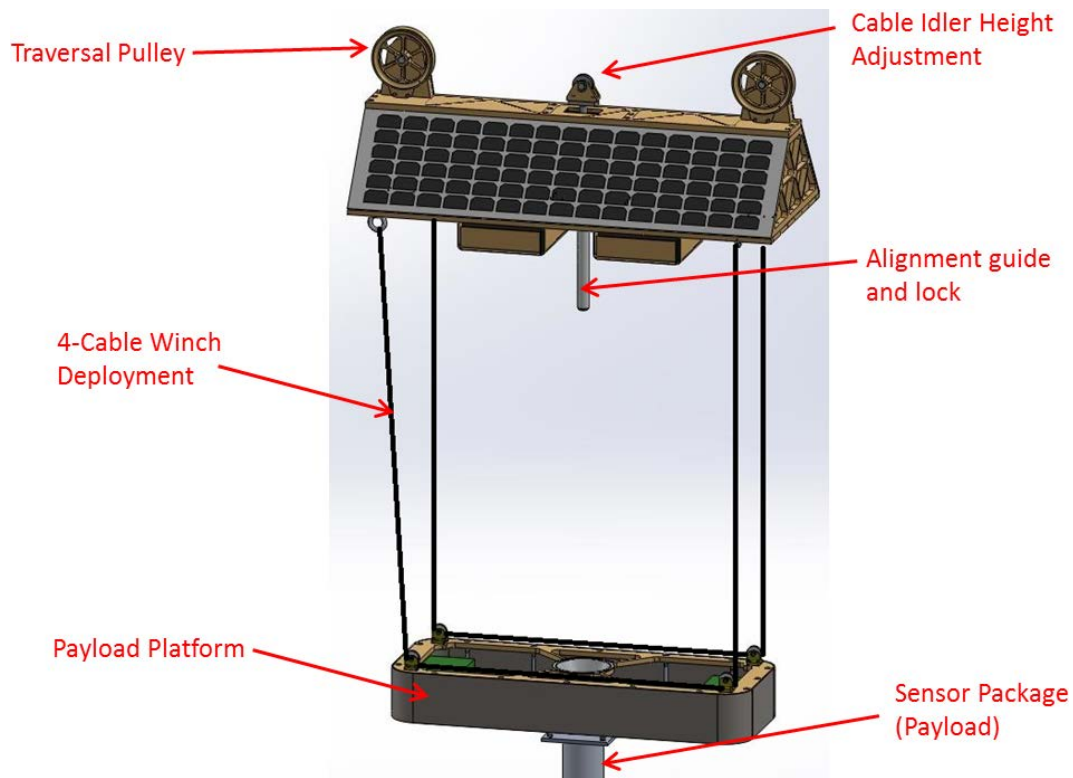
CAD Design of Tyrobot mechanism. Instead of attaching the winch cables to the payload directly, the cables attach to a platform that stores the electronics and provides a more stable base. When lowered, communications to the top trolley are wireless, removing the need for any tether management.
